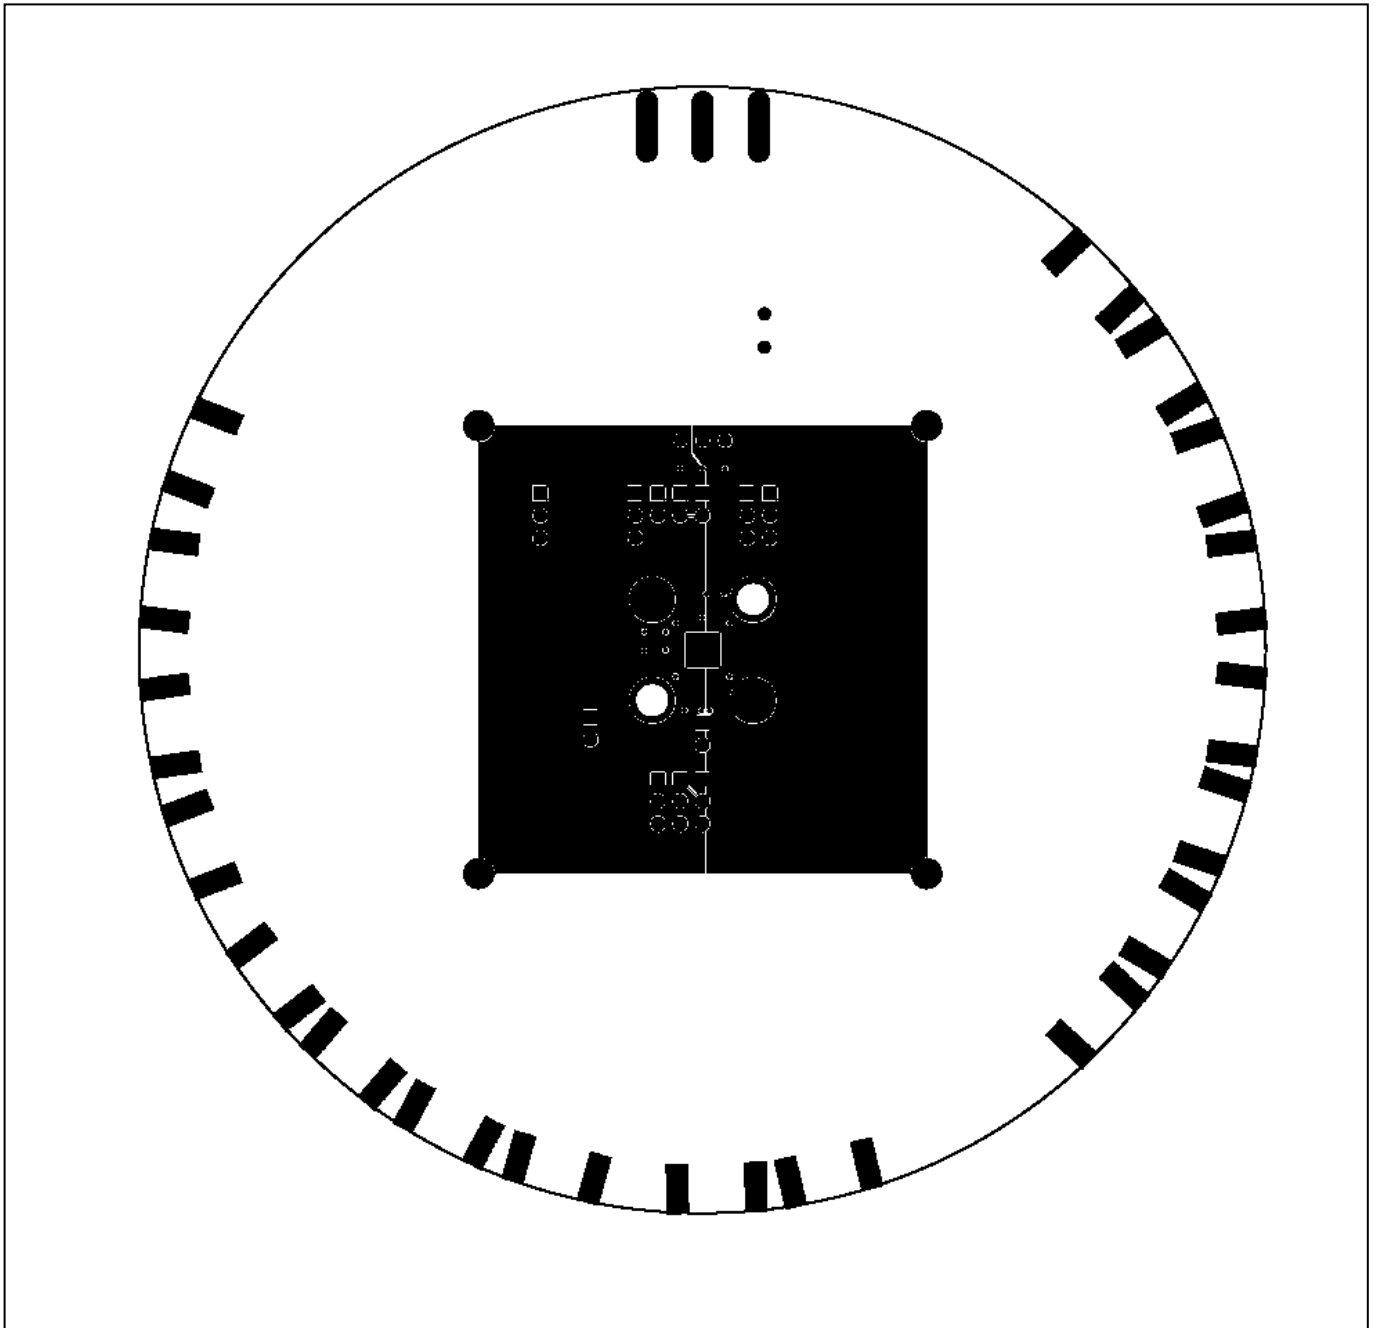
MAX3882 EV Kit PC Board Layout—Solder Side
